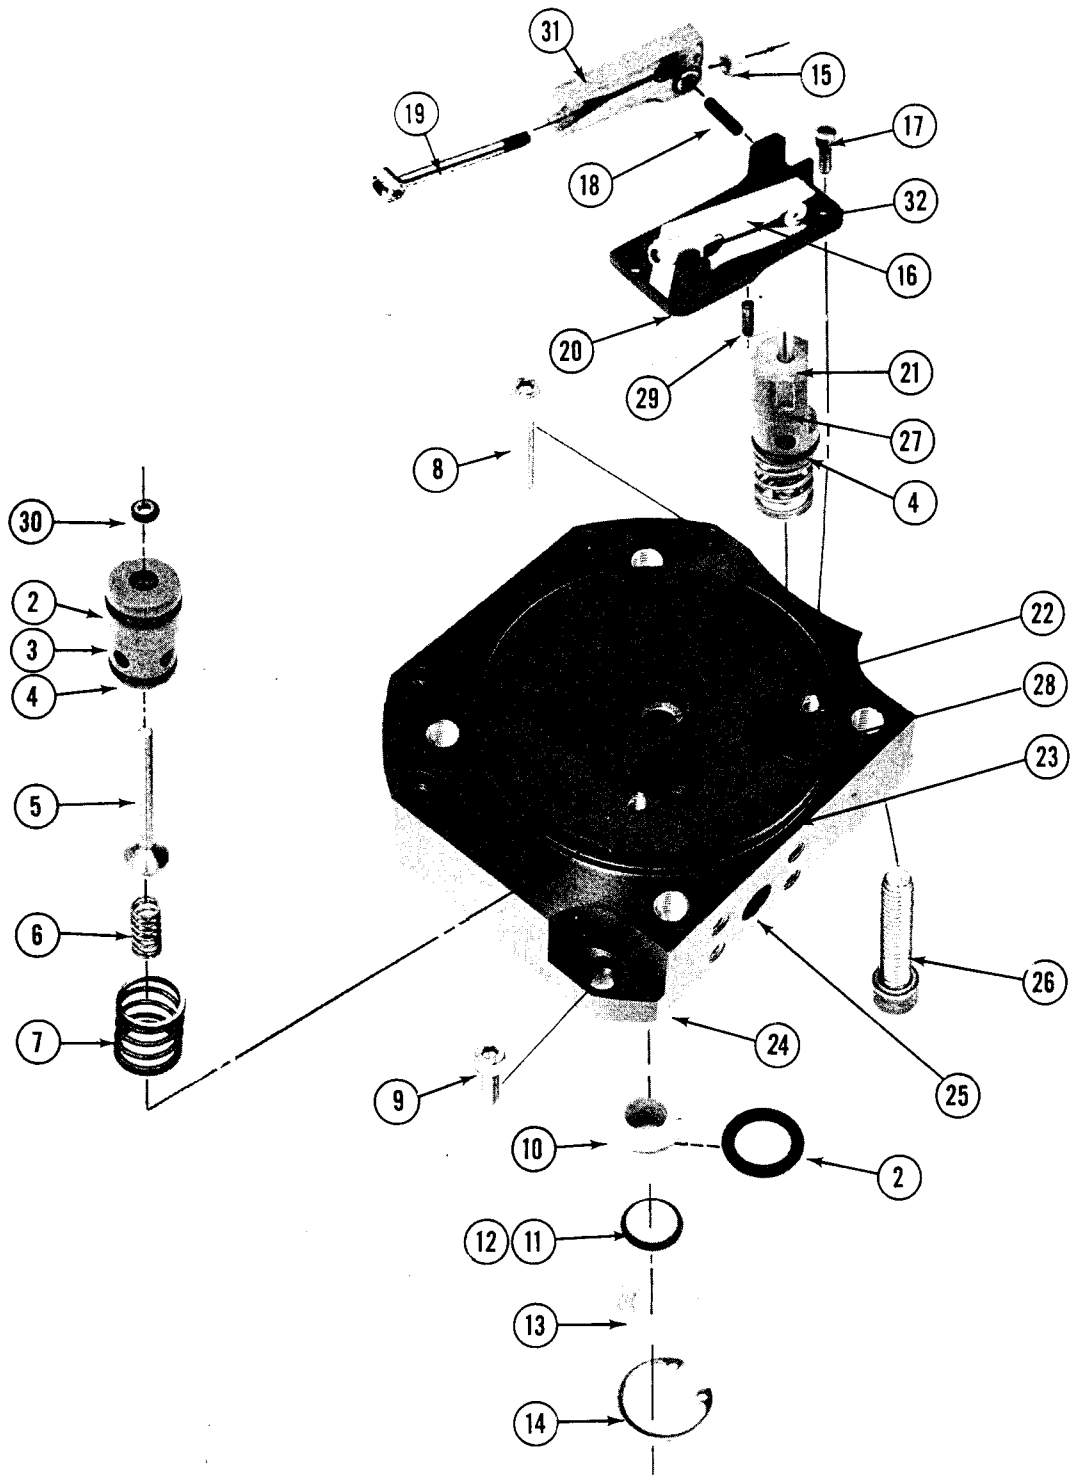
THE VALVE PLATE--EXPLODED VIEW
